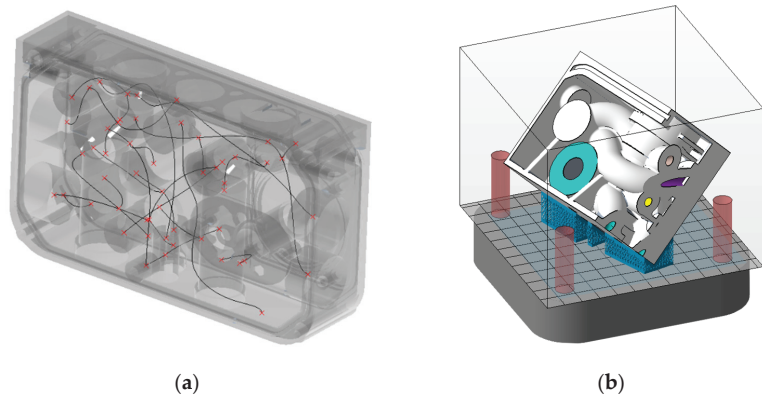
(a) Manifold main elements with spline curves between starting points (red marks) for channel design; (b) pre-study part: Cut-out from the hydraulic manifold.
